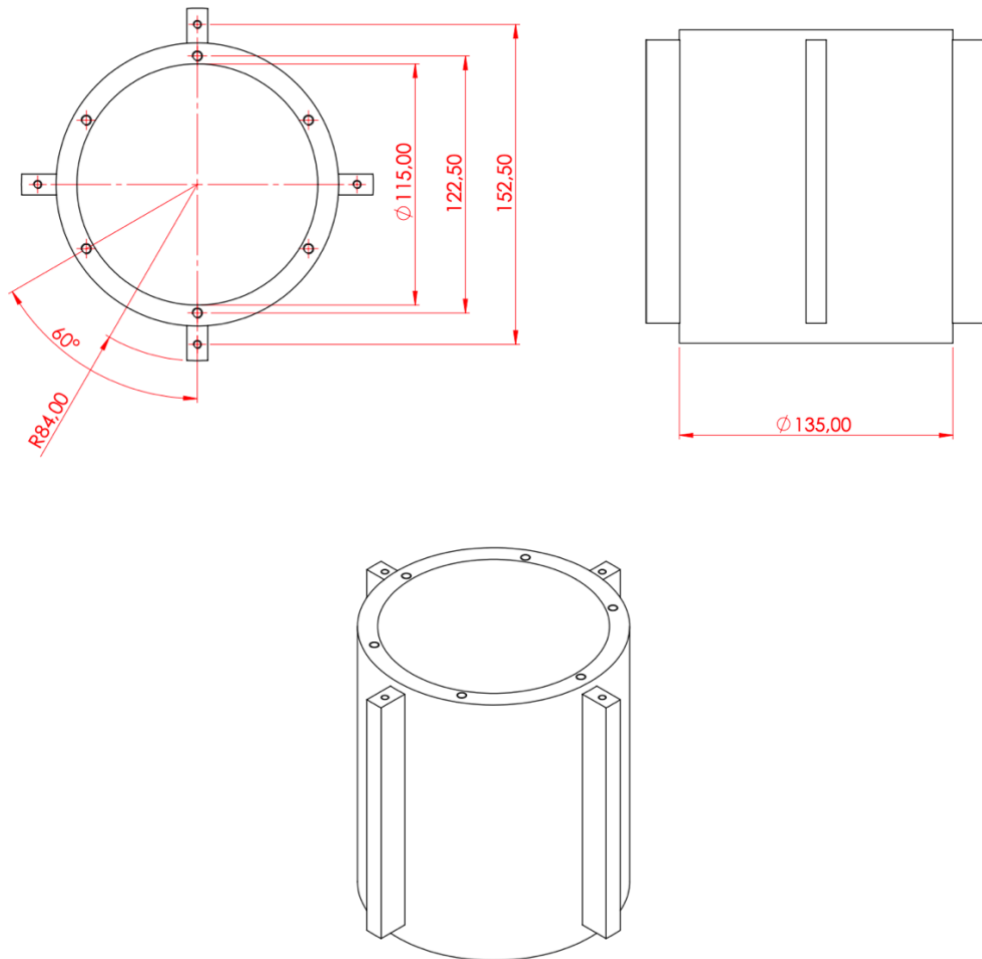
Dynamic Test Layout, Stator 4. Design
